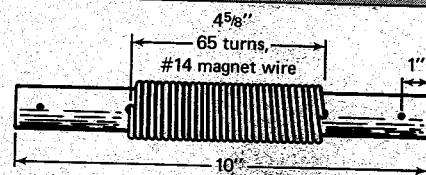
Dimensions and hole locations for the 80 meter coil and form. The coil is 3/4 inch PVC pipe, schedule 80.
